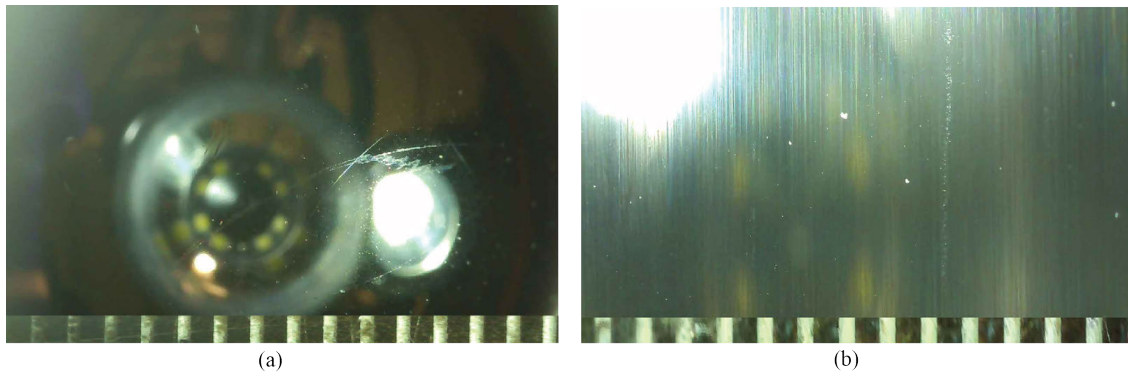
6206 bearing Brinelling case after dropping the bearing at 1 m
